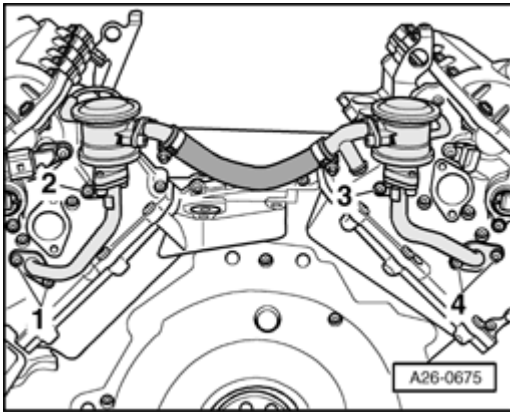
Removing Secondary Air Injection (AIR) System Combi-Valve Mounting Bolts
